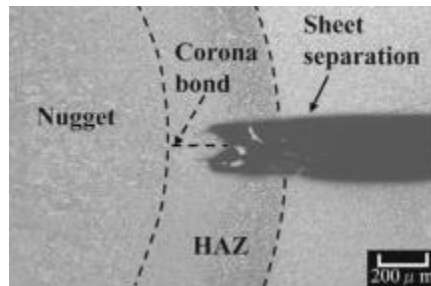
Identifying Corona Bond in a Spot Weld [34]
